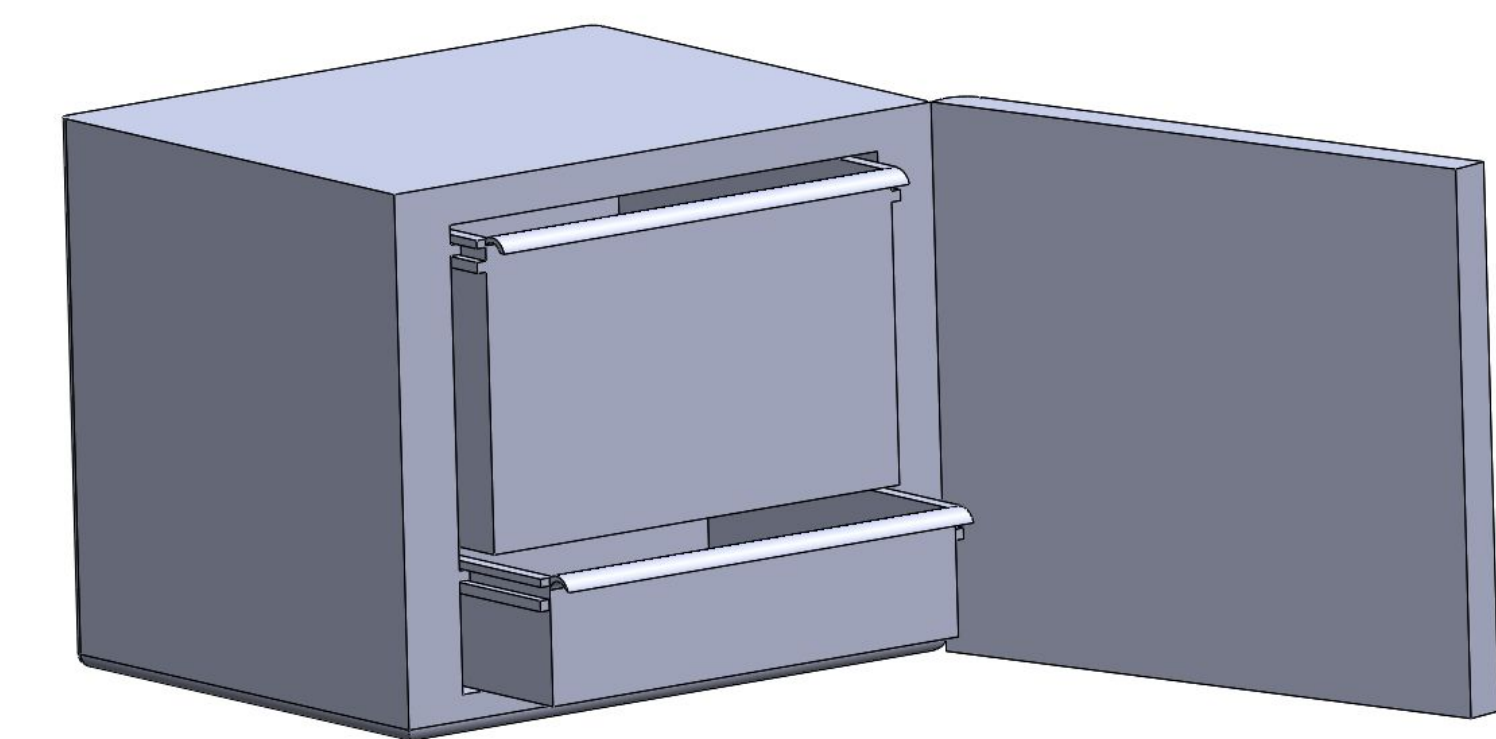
The second prototype included minor adjustments to the size, additional space for the electrical components, and drawer tracks.
